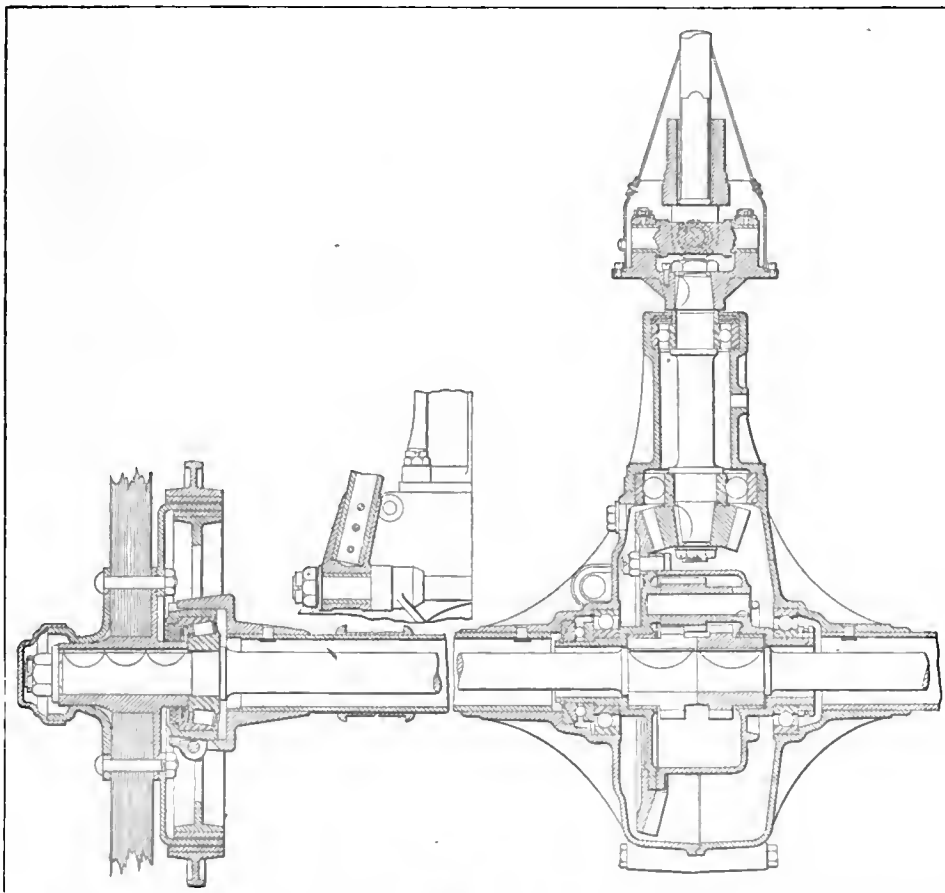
Drawn steel brake drum and housings for universal joints, as used in Pierce-Arrow live rear axles
